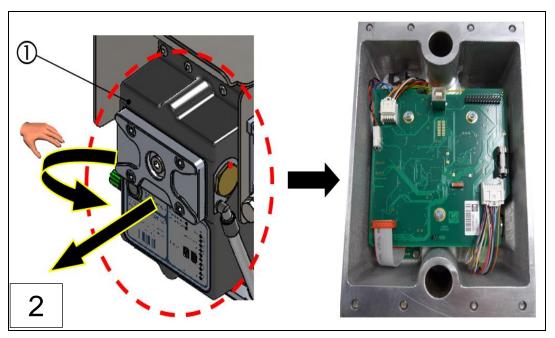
Removing the VN2020 measuring head (installation steps 1-2)
